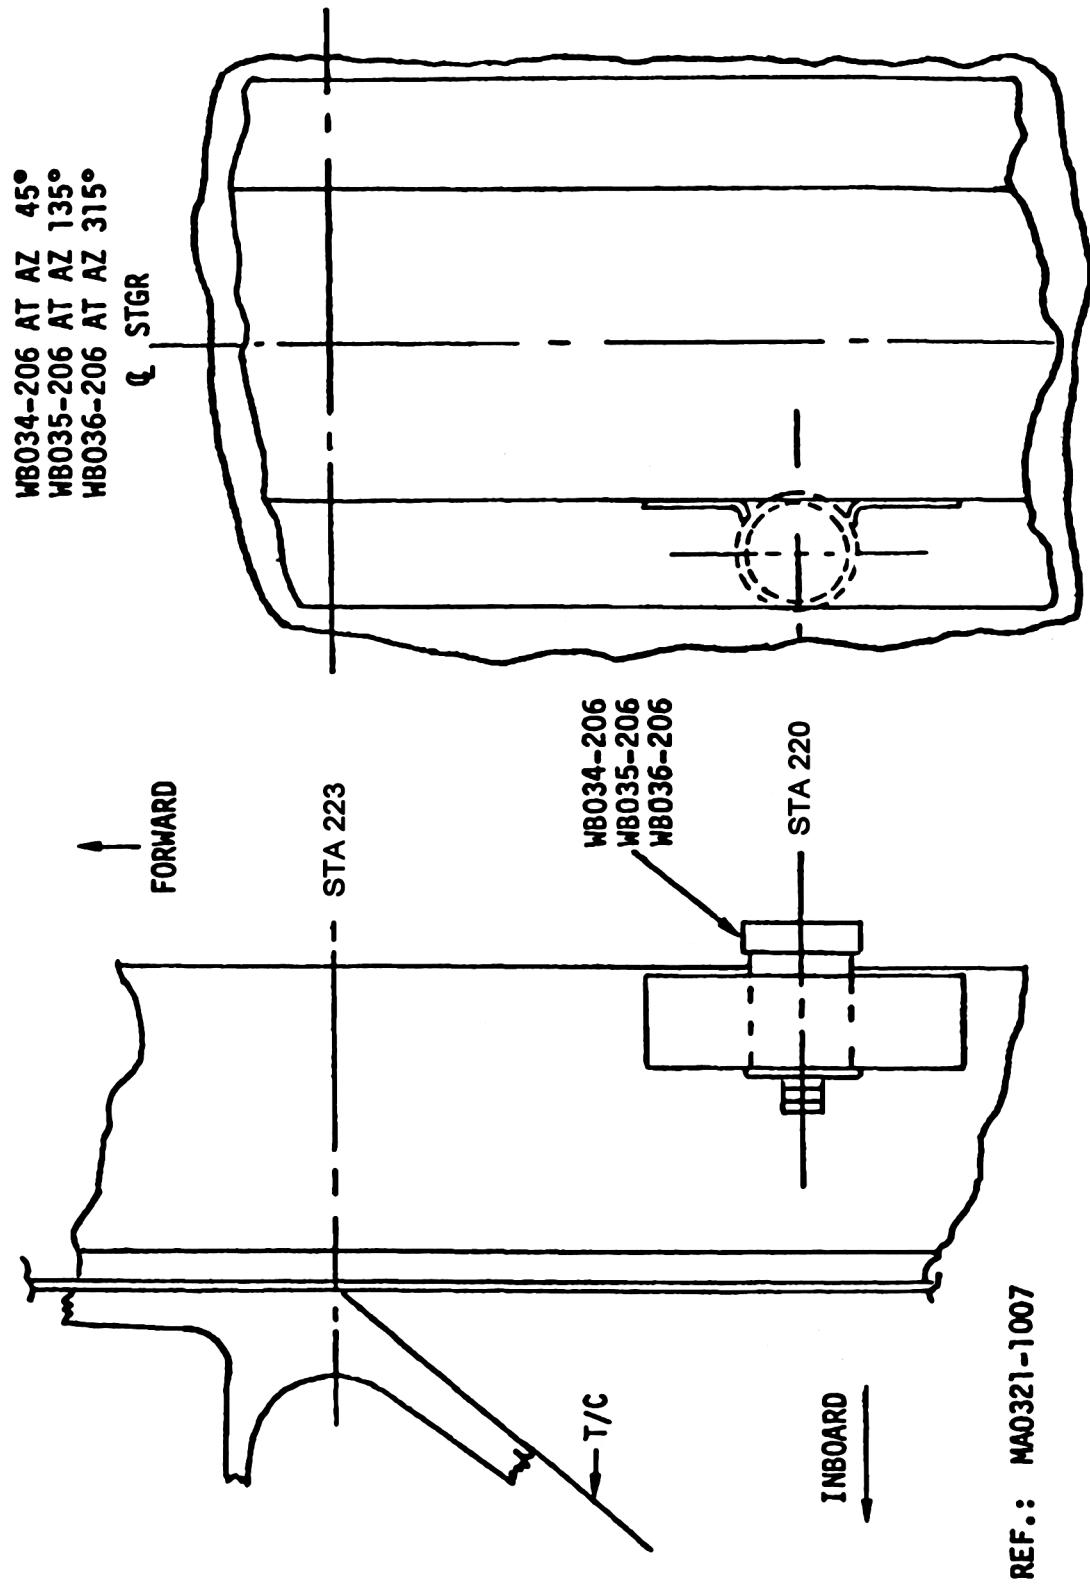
Zone 9: S-II stage aft skirt external acoustic measurement location.
